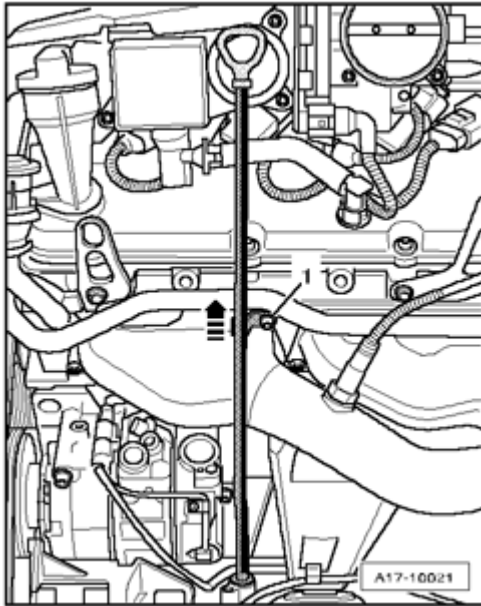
Pulling Oil Dipstick Guide Tube Upward And Off
